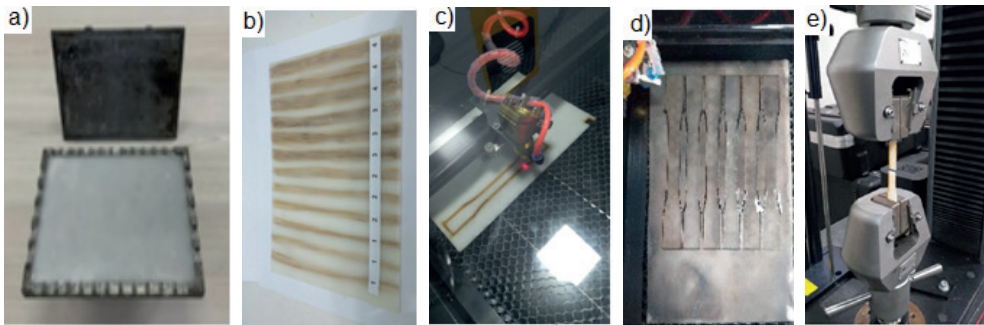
Manufacture of specimens: a) and b) molded composite plate, c) and d) cutting of specimens in a laser machine, e) Tensile test
